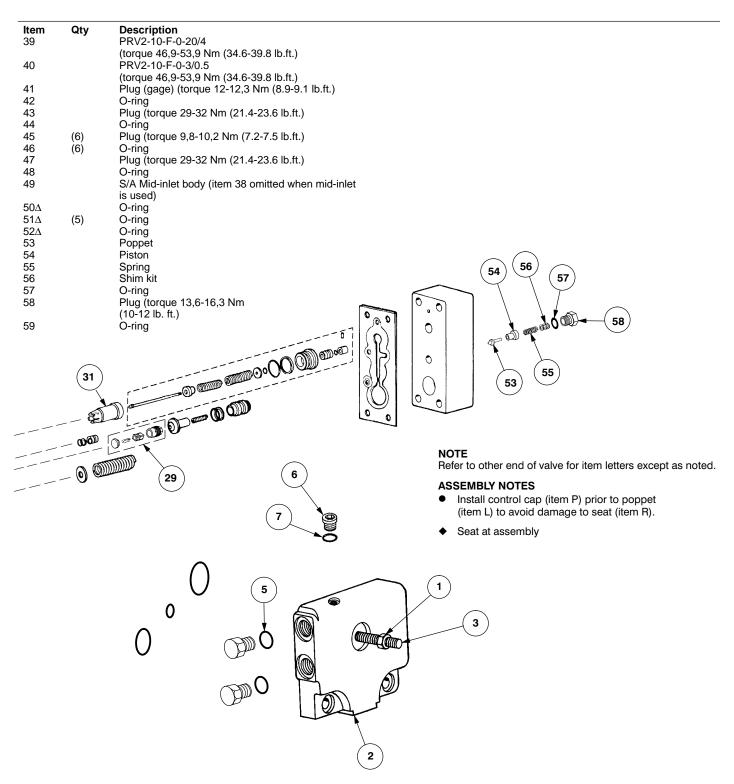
CMX Electrohydraulic Valve Bank Exploded View
